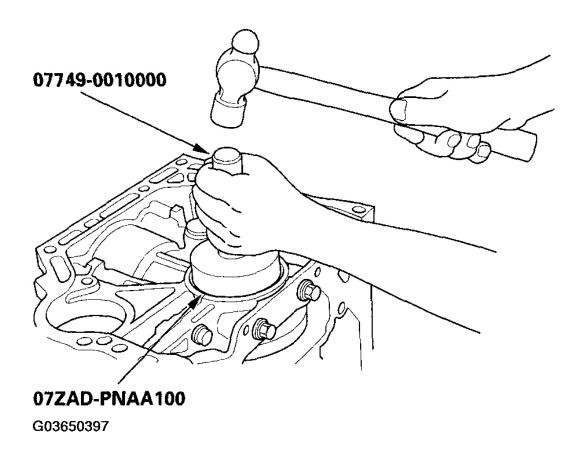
Installing Oil Seal Courtesy of AMERICAN HONDA MOTOR CO., INC.
